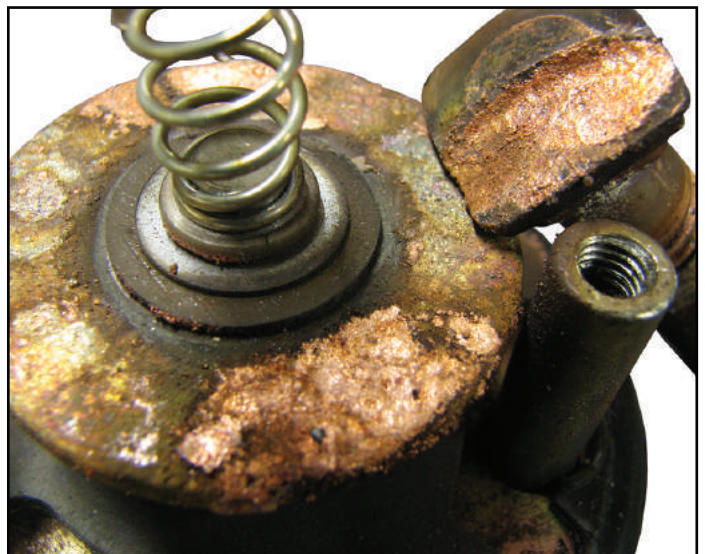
This solenoid was removed from a 37MT starter that had stayed engaged with the engine running.
